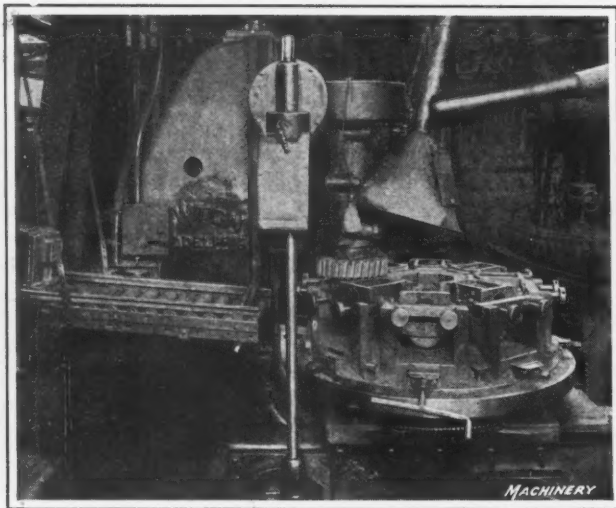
Newton Continuous Rotary Miller machining Automobile Transmission Gear-cases
